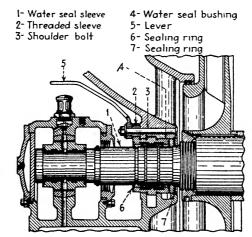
Water seal and hand-operated sealing rings. (Courtesy of Allis-Chalmers Manufacturing Co.)
